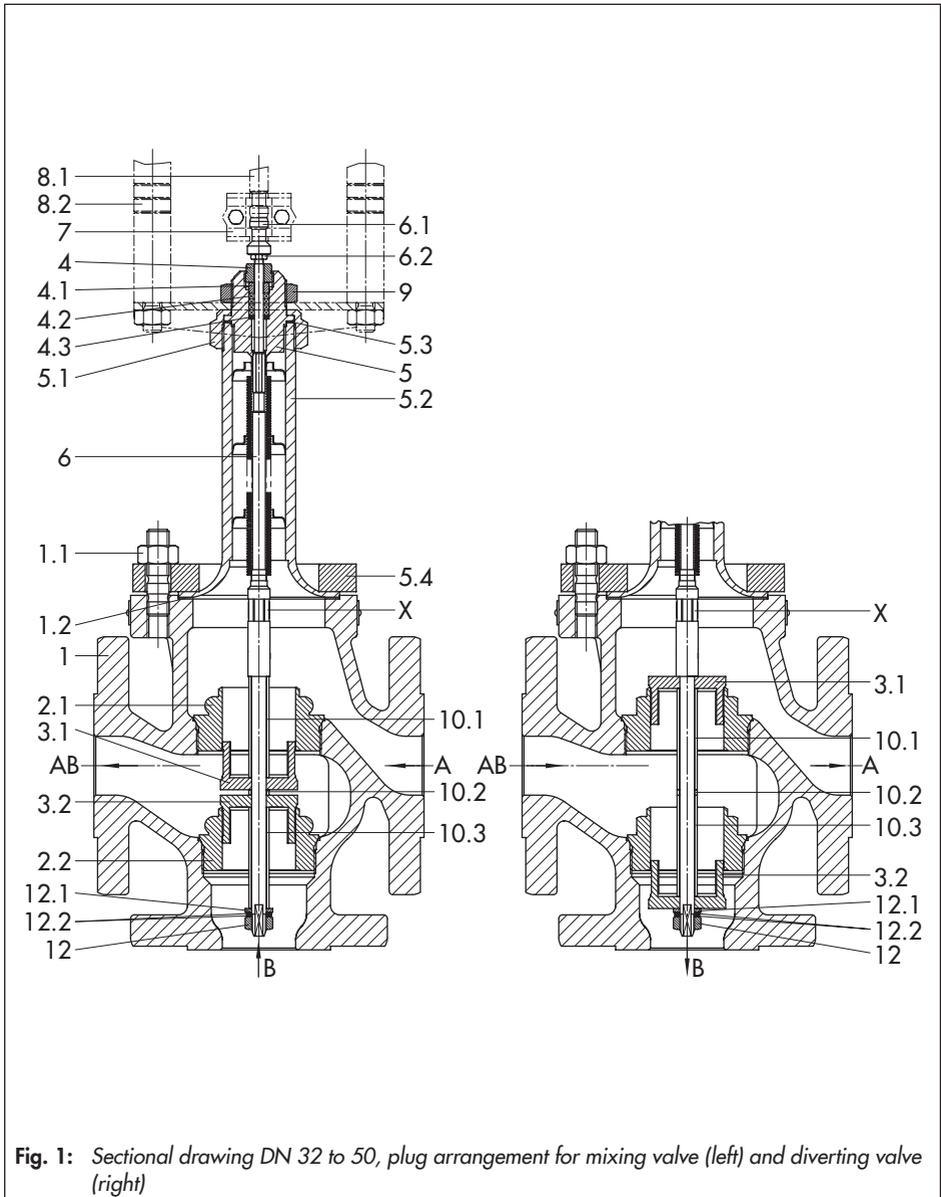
Sectional drawing DN 32 to 50, plug arrangement for mixing valve (left) and diverting valve (right)
